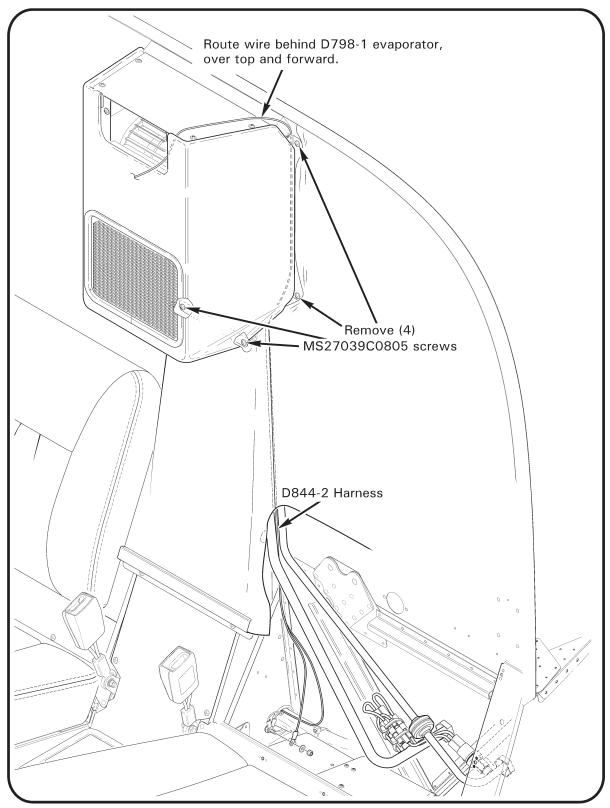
location for D844-2 harness wiring (view looking aft, inboard)
